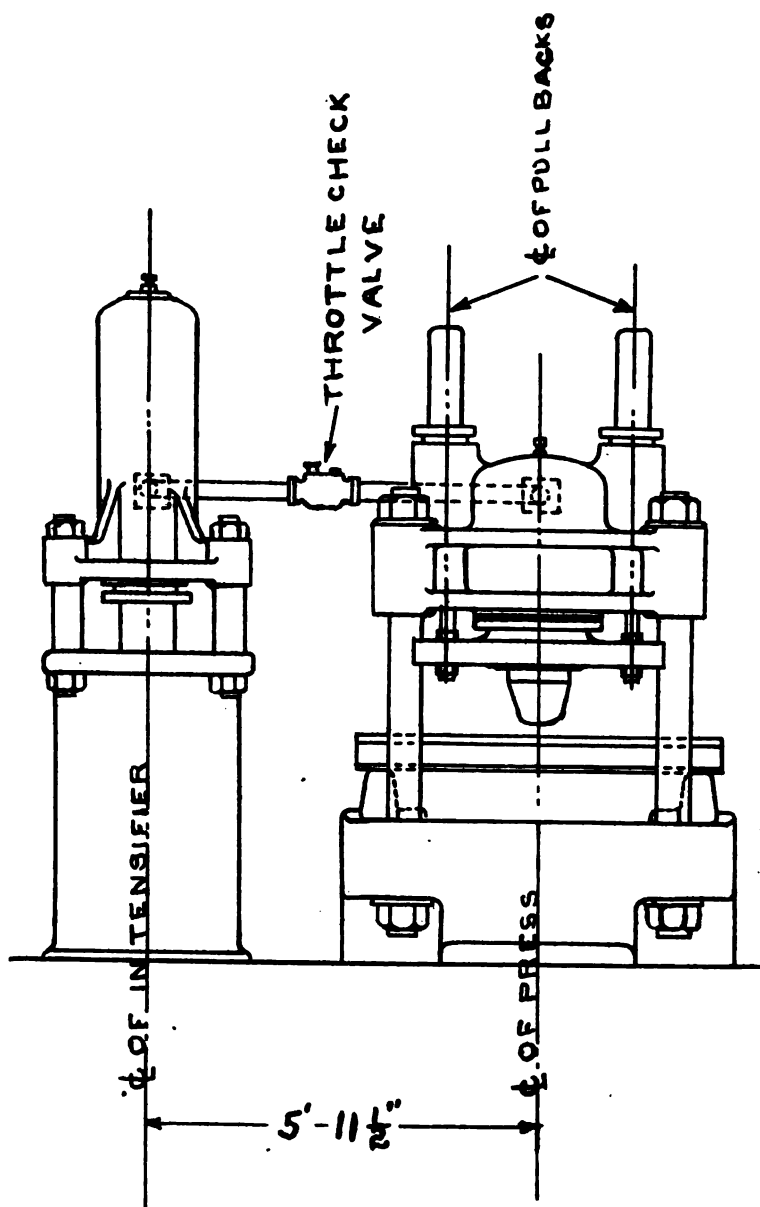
GENERAL ARRANGEMENT OF QUICK BEND TEST MACHINE.
